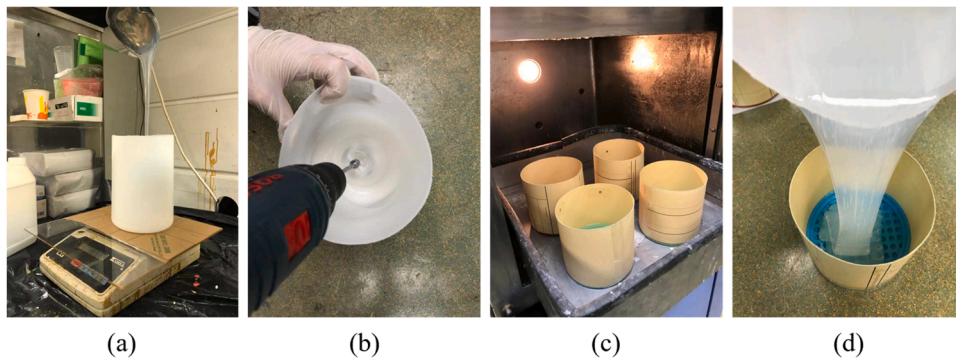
The process of developing flexible formworks: (a) weighing part A and part B; (b) stirring the mixtures; (c) removing the trapped air; (d) pouring out the mixtures.
